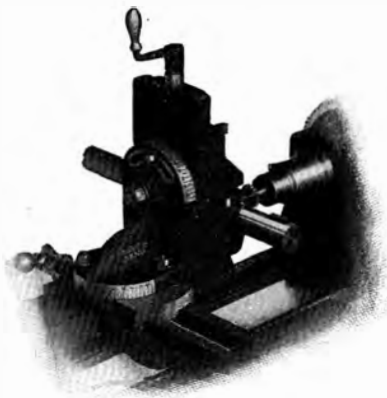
Fig. D. Milling a Woodruff Keyway in a Shaft on the Lathe
